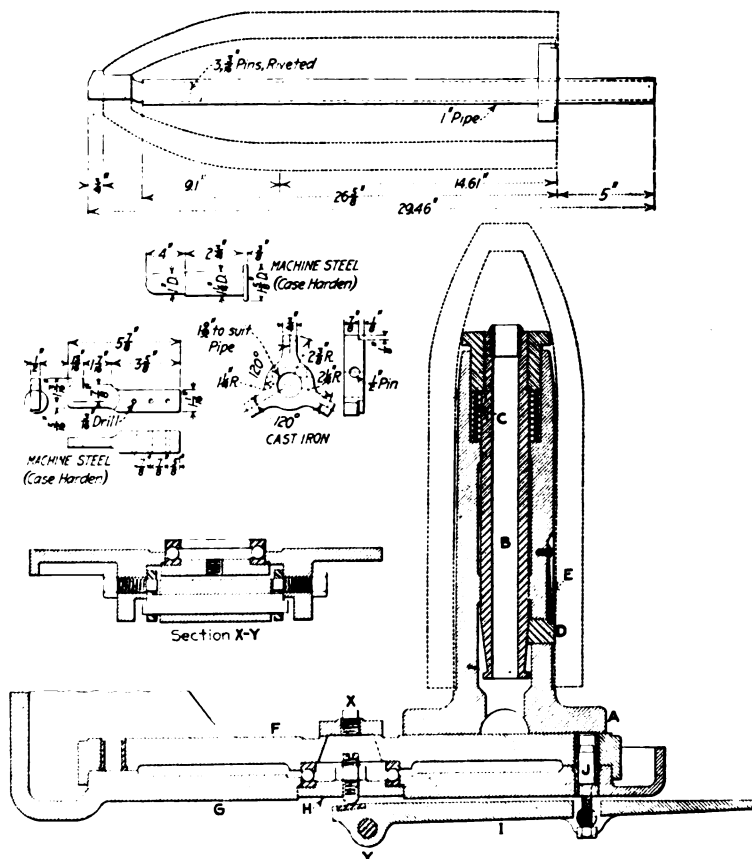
DETAILS OF DRILLING FIXTURE AND GAGES
